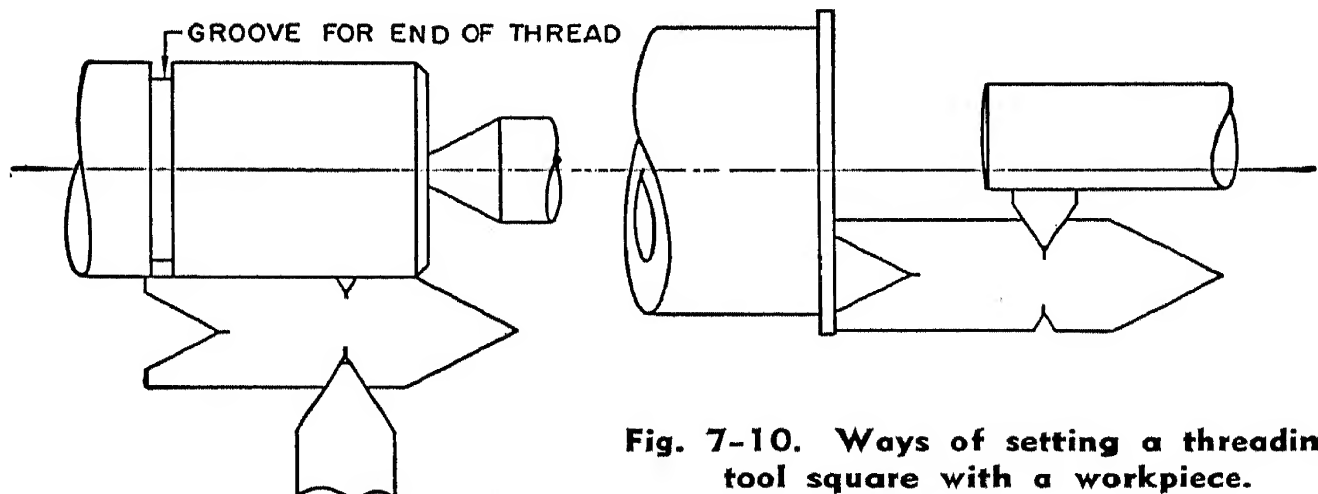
Ways of setting a threading tool square with a workpiece.
